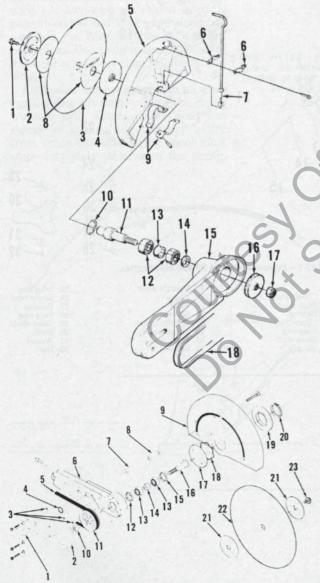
Exploded view of saw arm assembly used on Model XL98A.
